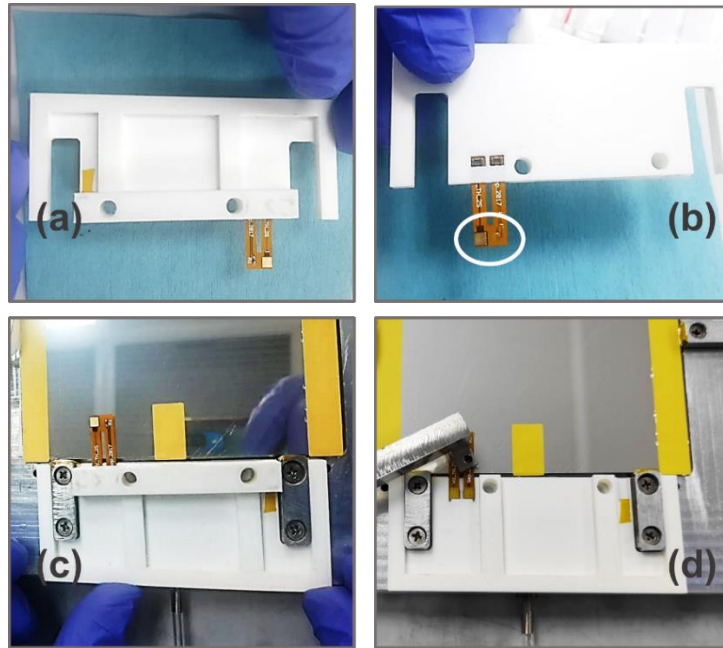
HV-tail gluing process: (a) HV-tail is held inside the groove of the extension jig. (b) Glue is applied to the tail. (c) The extension jig is landed on the PI gluing Sensor holding jig. (d) A weight bar is applied on the glue joint to hold the tail firmly.
